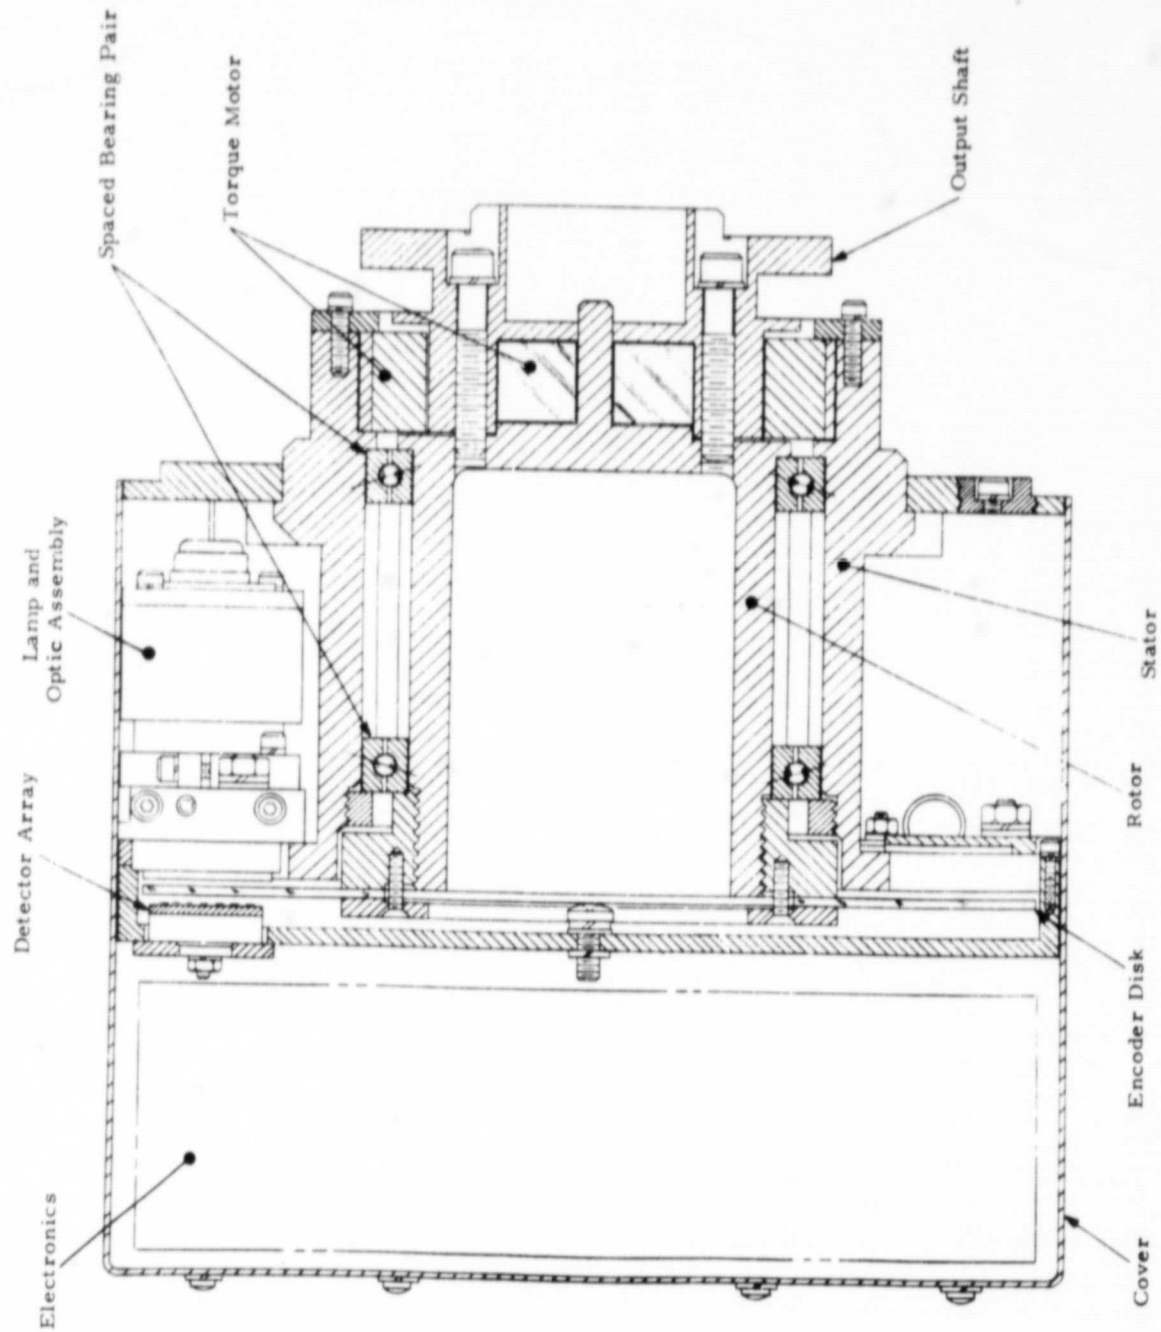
Encoder/Torque Motor/Bearing Cross Section
